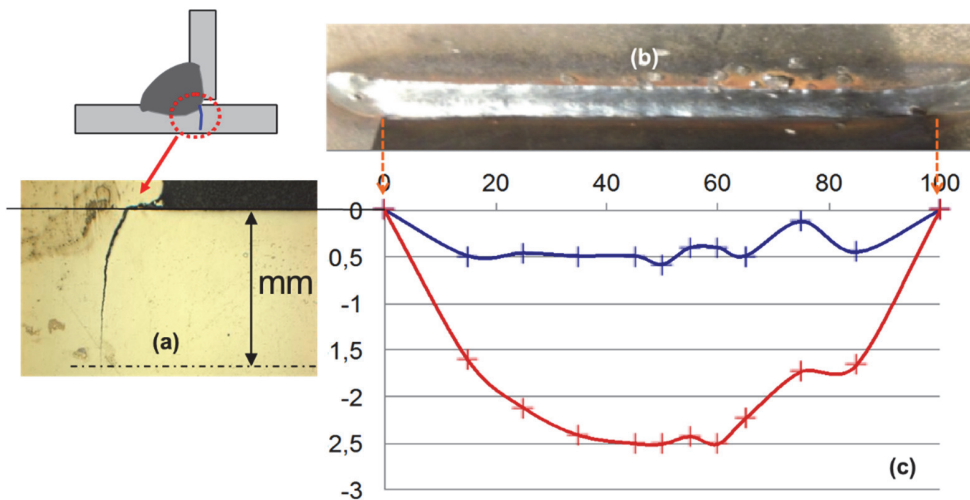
(a) Fatigue crack depth from the surface; (b) general view of the welded junction; (c) crack depth profile in depth.
